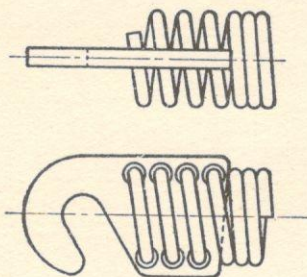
FORM M (THREADED PLATE, HOOK THREADED OVER 2 TO 4 THREADED COILS)
